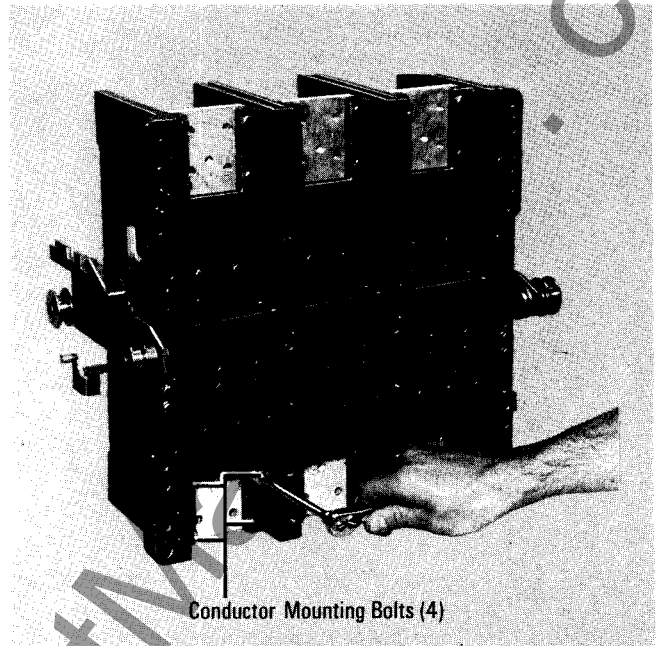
Removing Lower Moving Conductor Mounting Bolts From 1600 Amp Breaker Frame.
